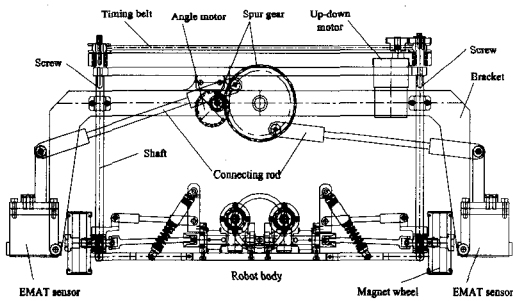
The EMAT lifting mechanism assembled with the crawler
